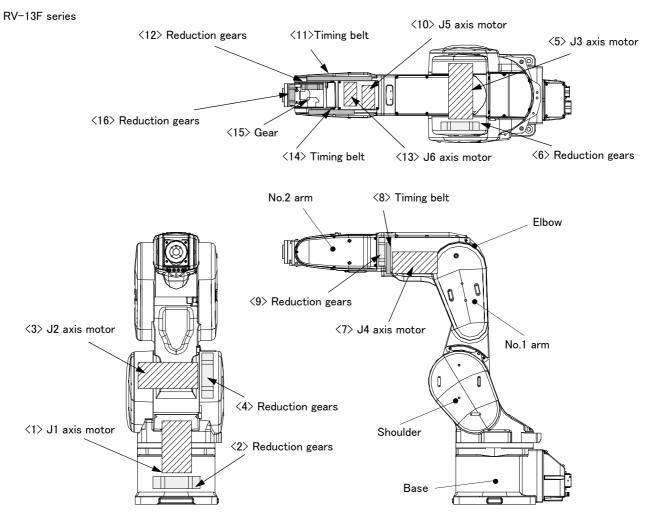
Outline structure of robot arm (RV-13F series)
